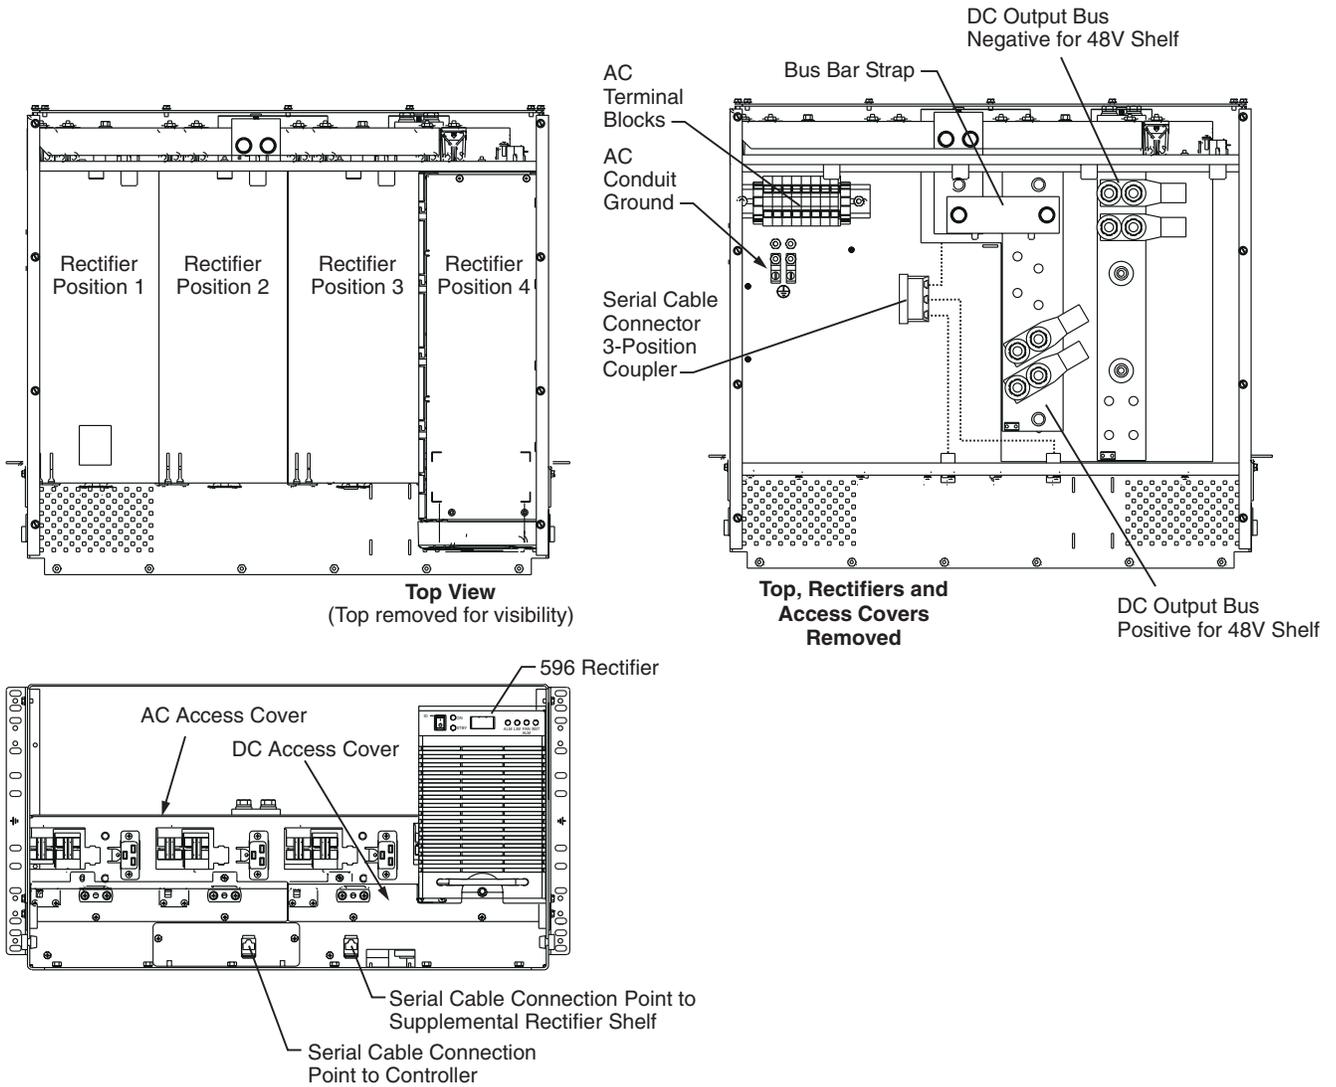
J85702H-1 L5, L5A and L6 Shelf Dimensions, Mounting Positions, and Cable Connection Points
